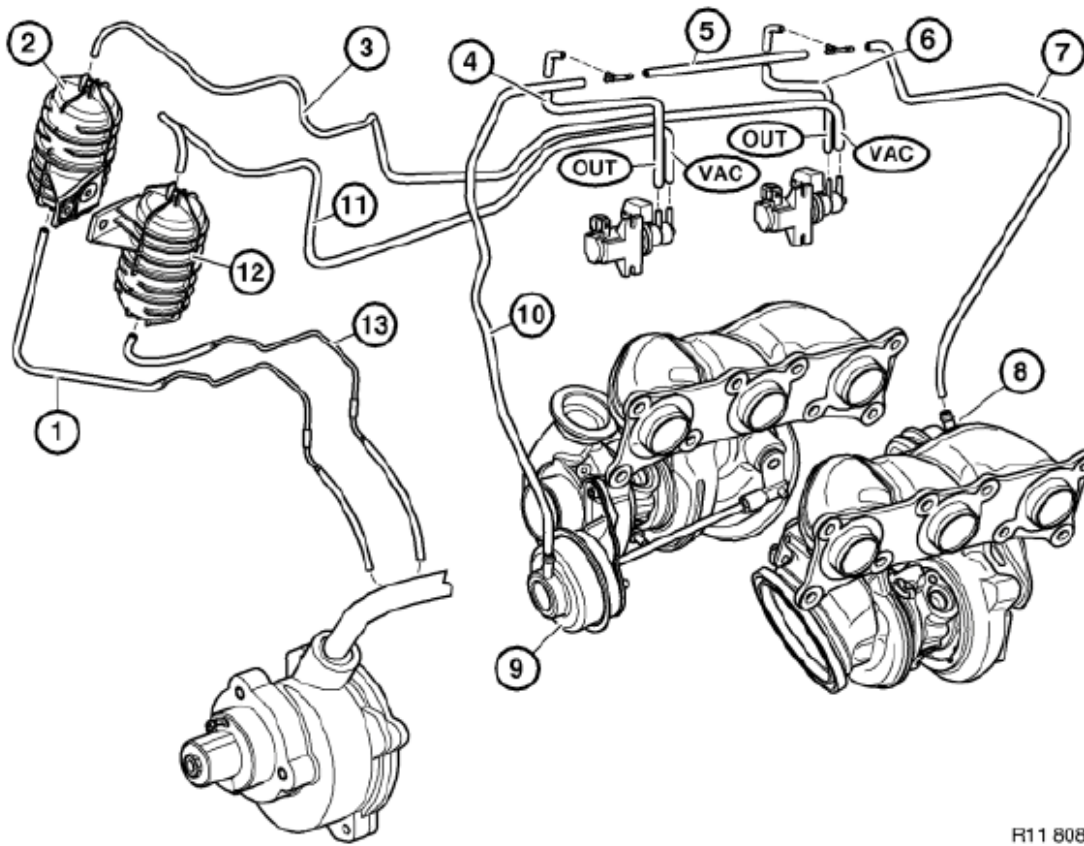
Identifying Pop-Off Valve And Vacuum Hose
